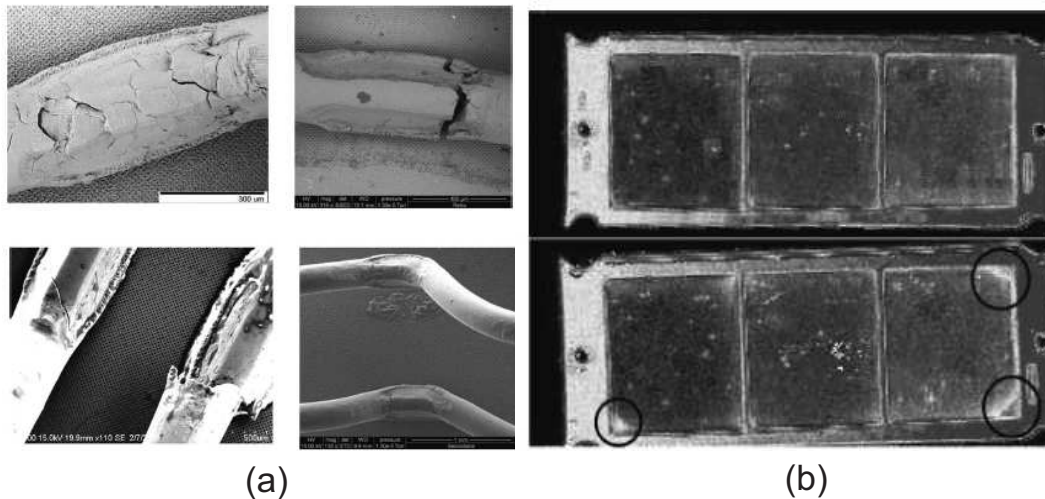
Aging failures in power modules (a) Bond wire metallurgic damage, heel crack, fracture and liftoff. (b) Solder damages.
